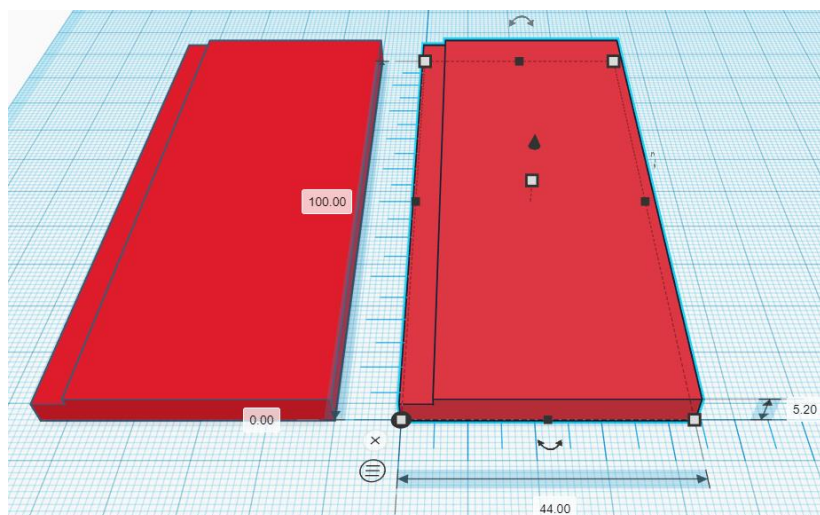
Computer-aided design for the preparation of a jig to cut DMA samples 5mm wide to ensure a consistent cross-sectional area during testing using the online design software Tinkercad.<sup>18</sup>
